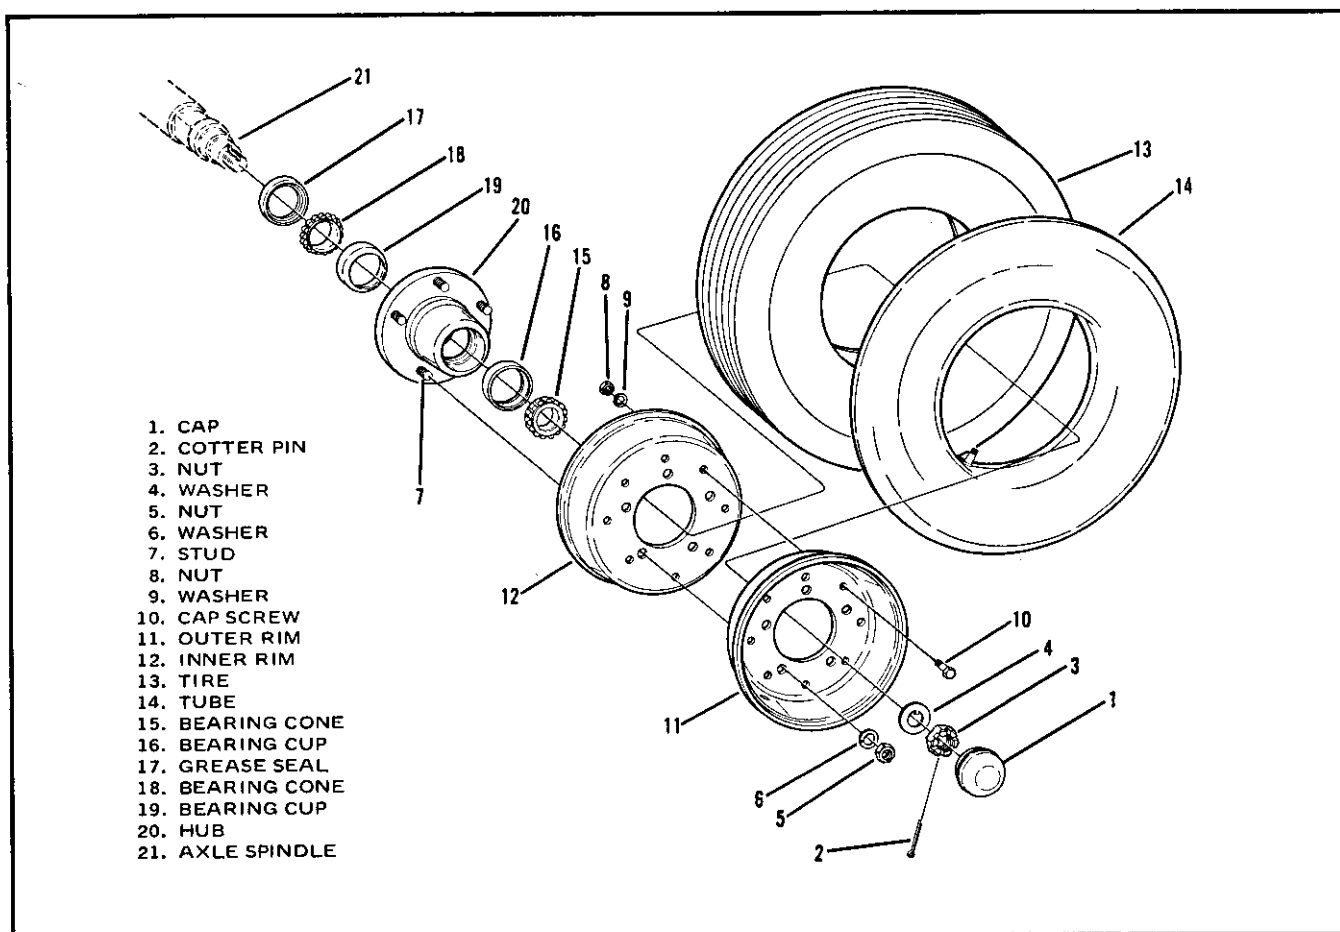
Wheel, Tire, and Tube - Disassembly and Assembly
